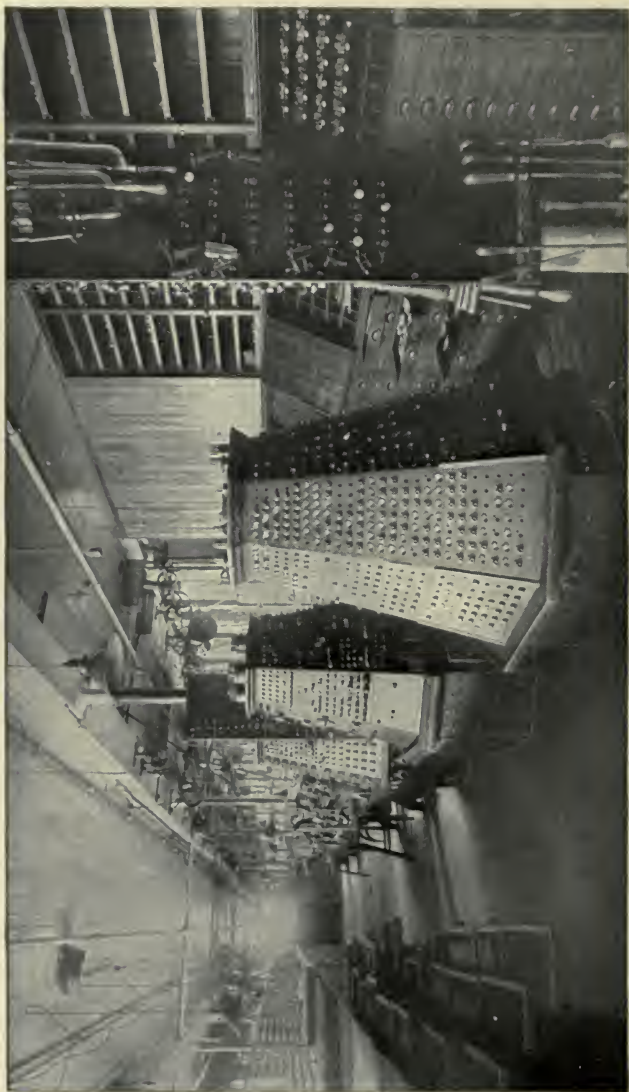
Plate III: A well ordered tool room is an index of a well managed shop. The tool room of the Waltham Watch Company, here shown is spacious without wasting space. Shelves, racks, cupboards and pigeonholes contain the various kinds of tools (See chapter V)
